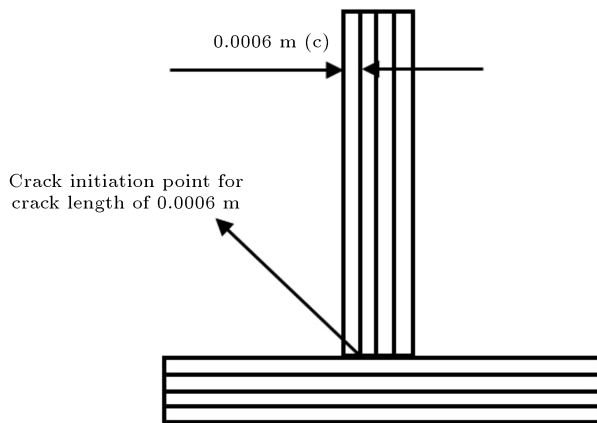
Schematic diagram of the laminated T-joint structure with adhesion failures.
